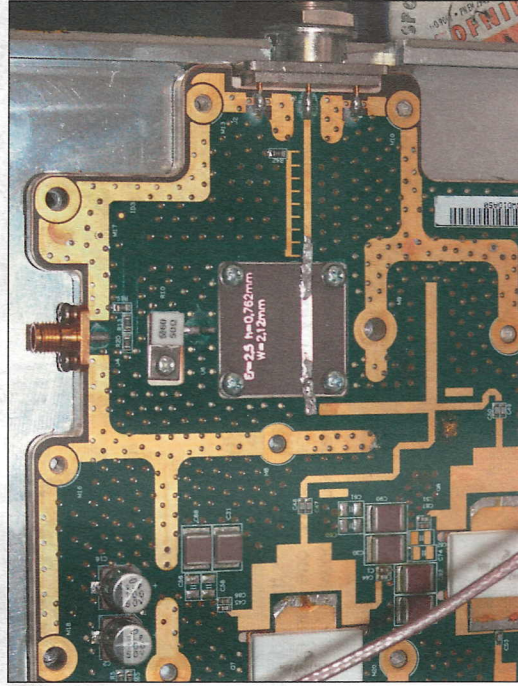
PCB with 50 Ohm track inserted instead of the output circulator
